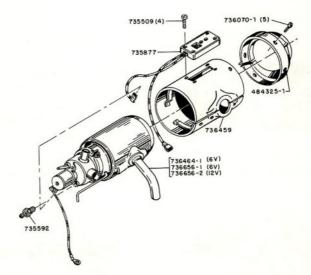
HEATER ASSEMBLY FOR KIT MODELS 8342-8343 (736478) 8345-8346 (736653)
